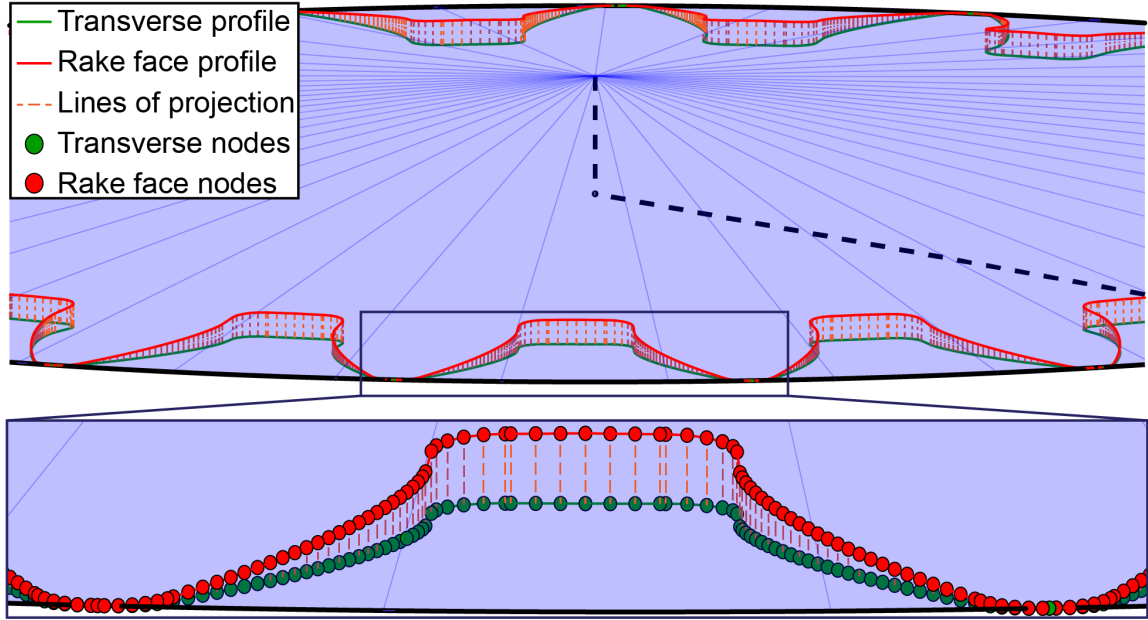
Generation of the cutting edge of a spur power skiving tool.
